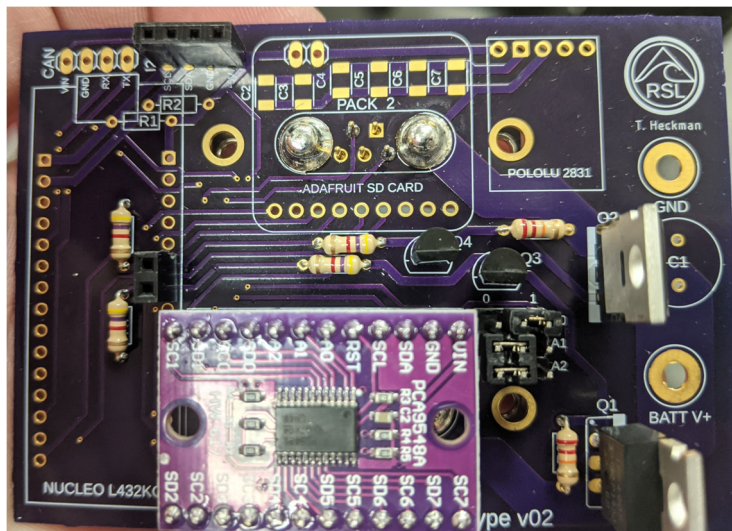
Fabricated Battery Monitoring and Control PCB
